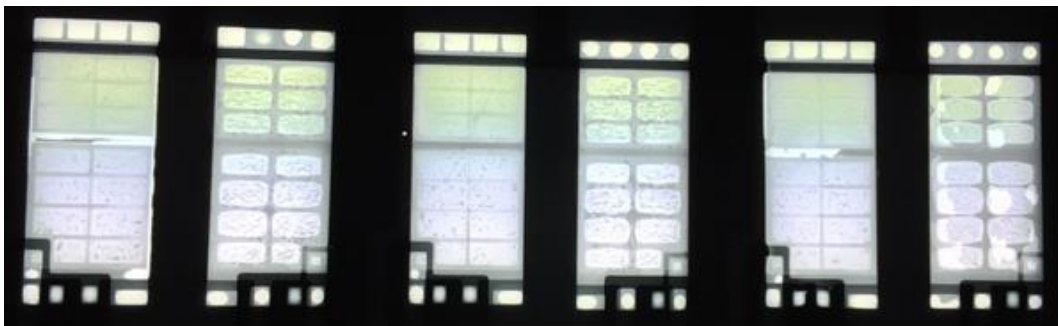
X-Ray image of the solder layer with 20% smaller stencil size.
